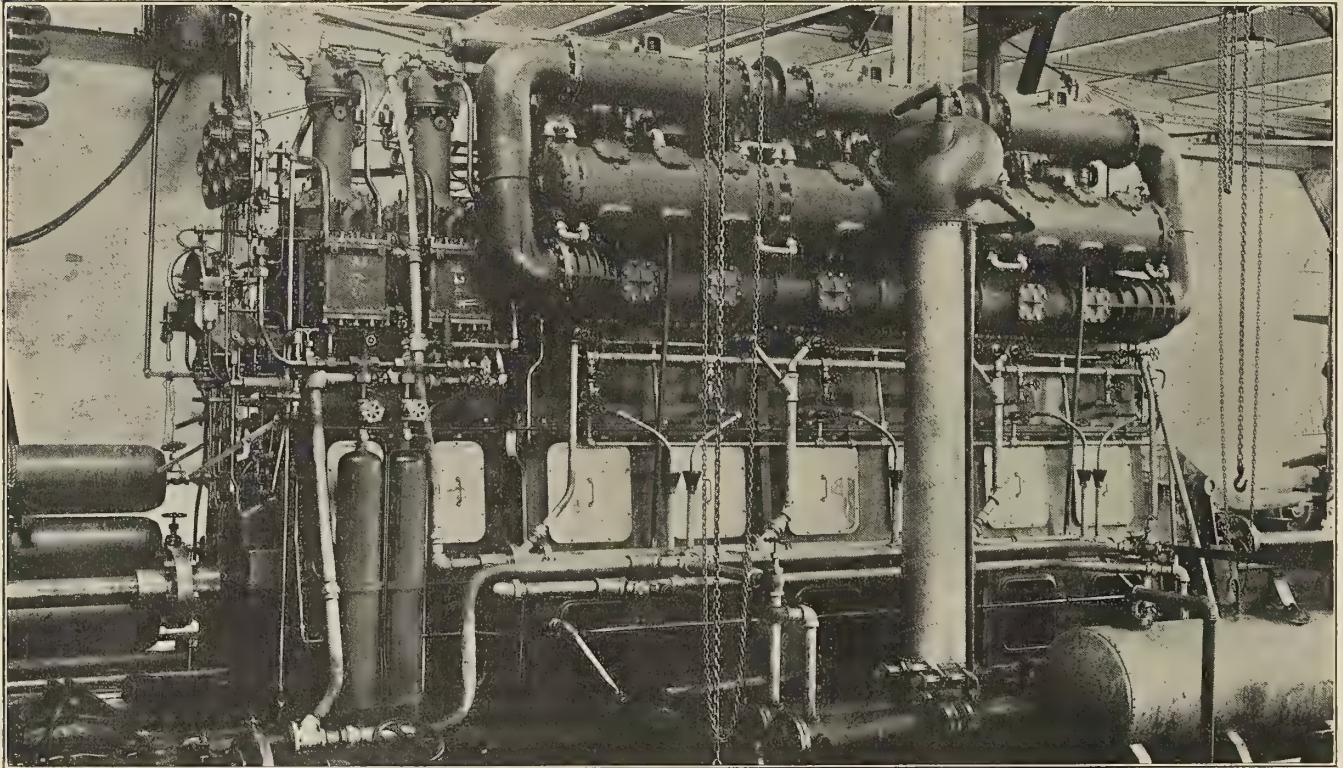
The *Fulton's* 1,000-Horsepower Diesel Engine on the Test Stand
